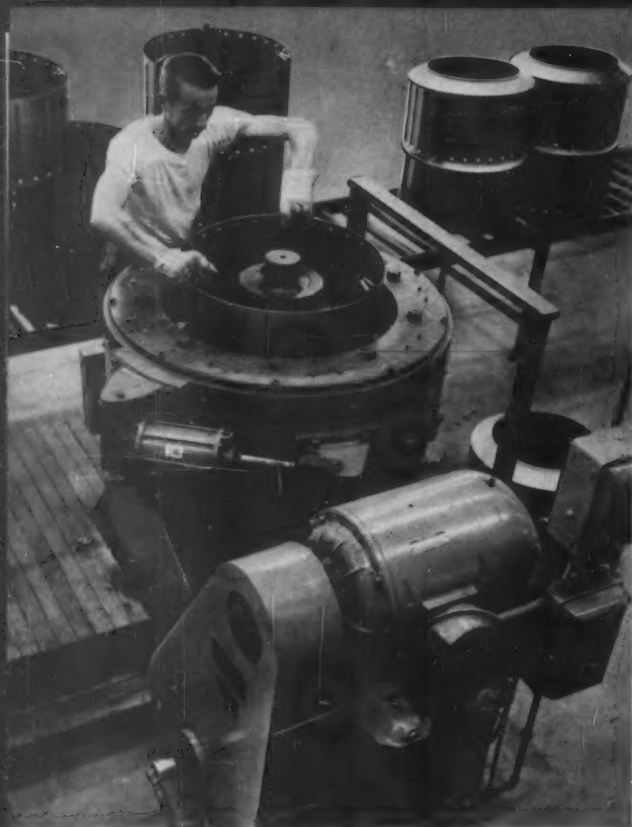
Mechanical expanding machine for increasing outside diameter of spinner basket to 25.500 inches. Dies enter vanes to prevent stretching in these areas.
